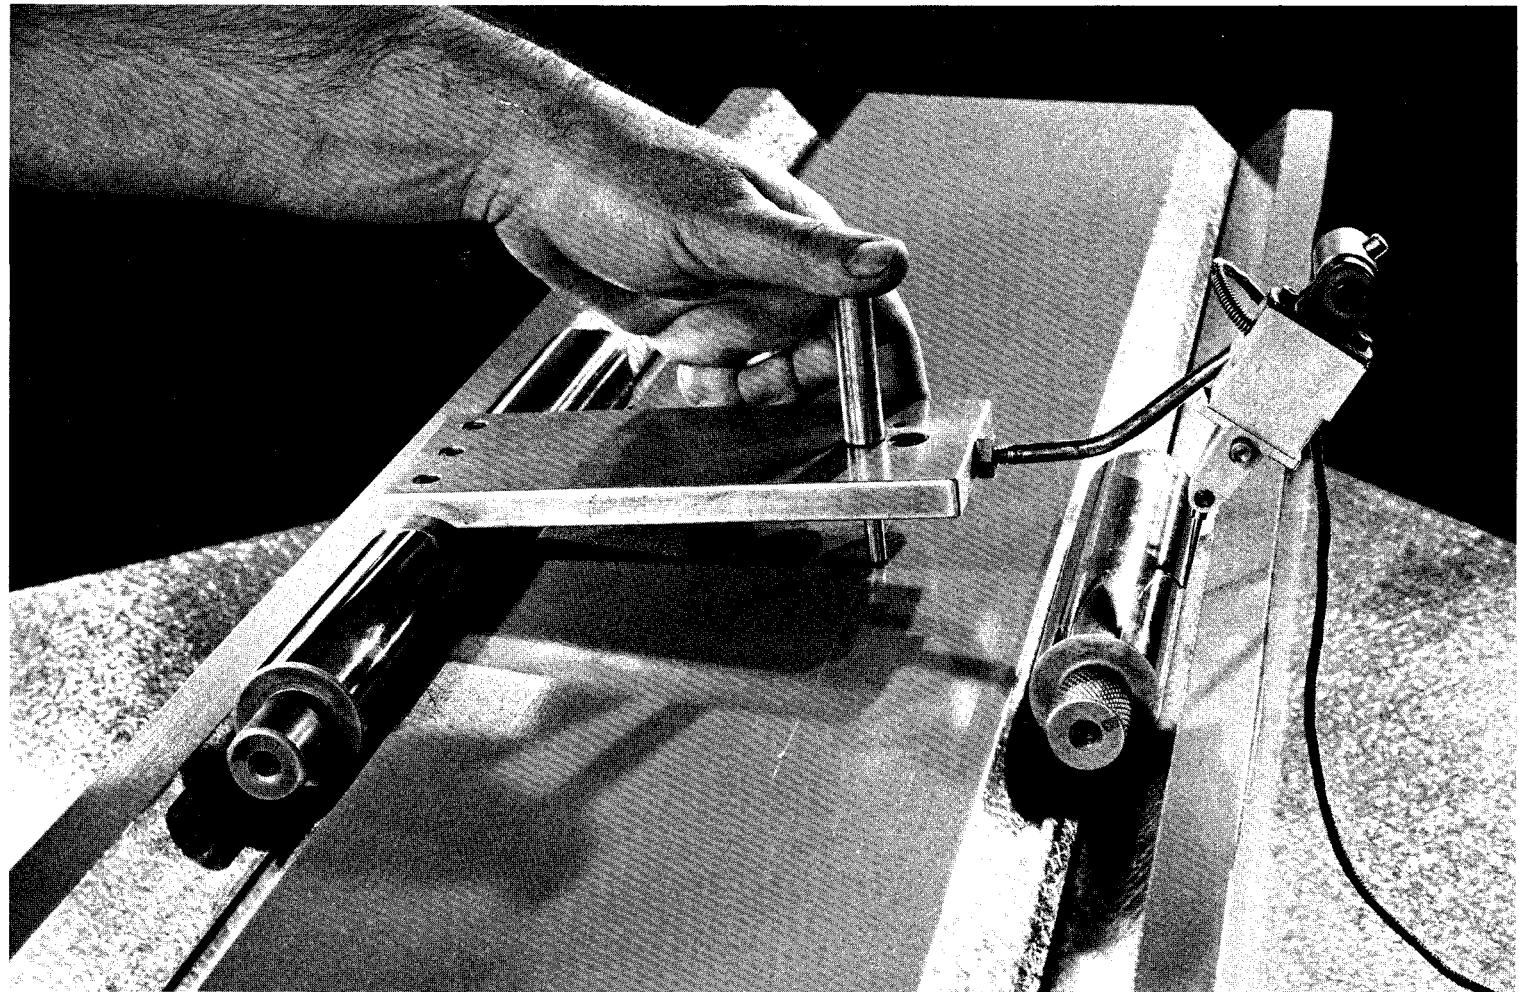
Horizontal parallelism is inspected with this gaging set-up, or by the reed-hinged gage shown in Fig. 46.
